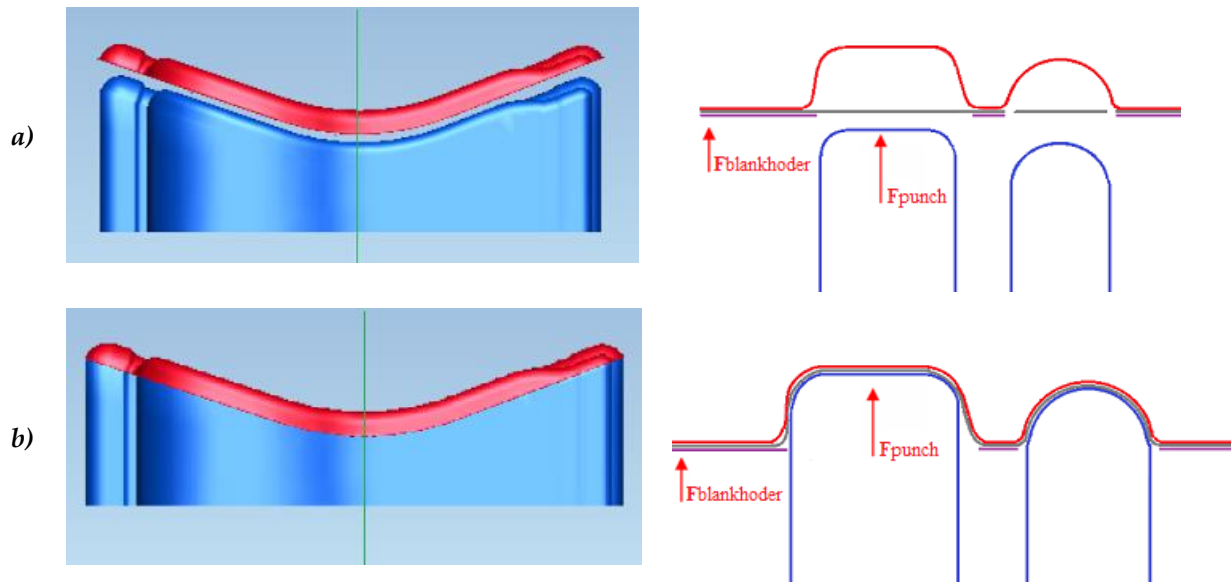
a) Tools and blank in initial position before deep-drawing operation. b) Tools and blank in home-position after deep-drawing operation.
